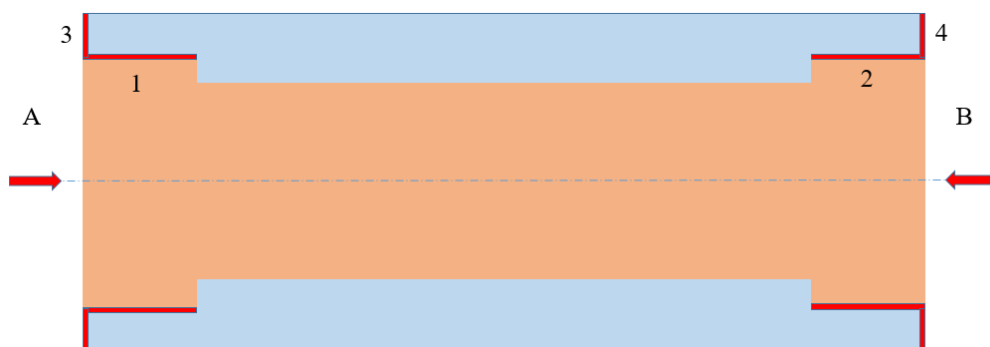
Marking diagram of shape and position tolerance of motorized spindle.
